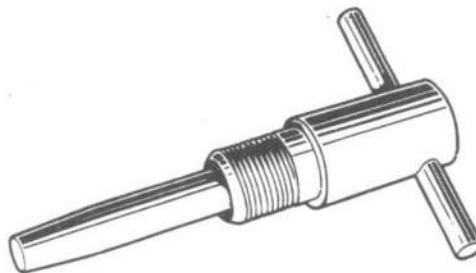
A.G.S. (Flylink) end fitting assembly tool
